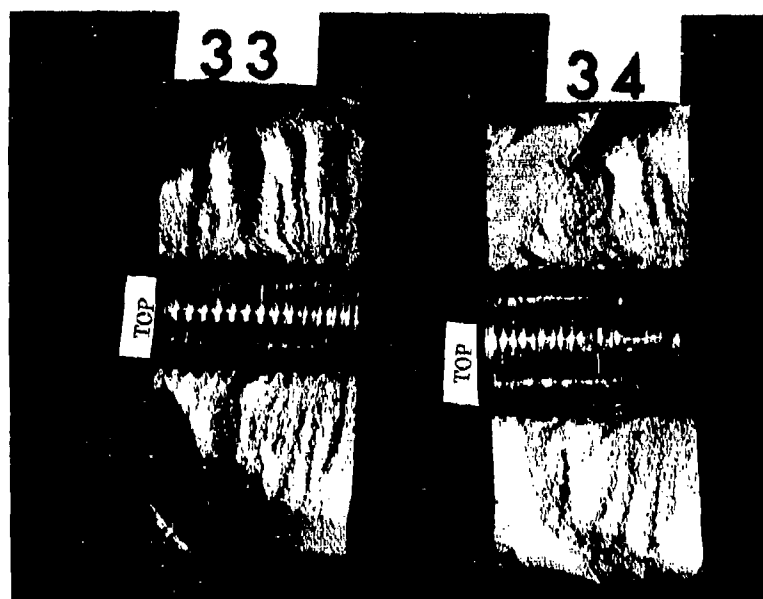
Close-up of Fatigue Failure of Specimens with Tridair and Groov-Pin 1/4-28 Size Insert. Inserts Installed by Manufacture.
